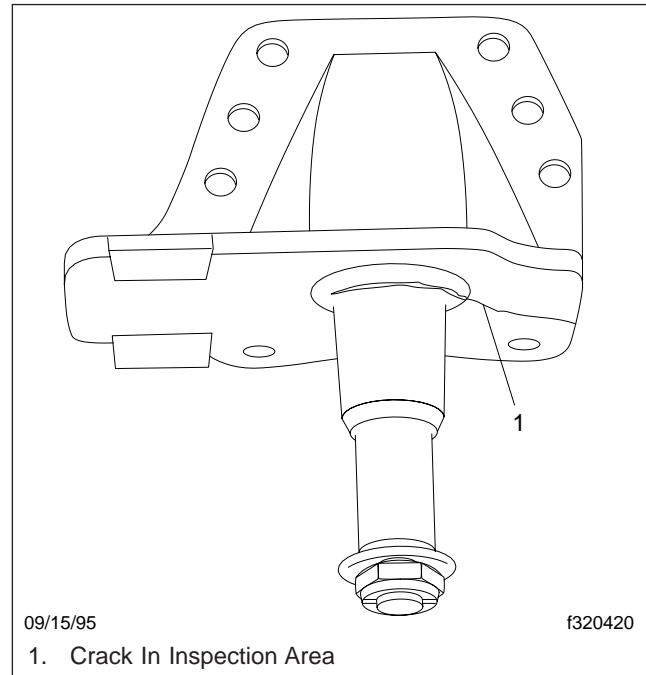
, Hendrickson RS Series Horizontal Mounting Flange
